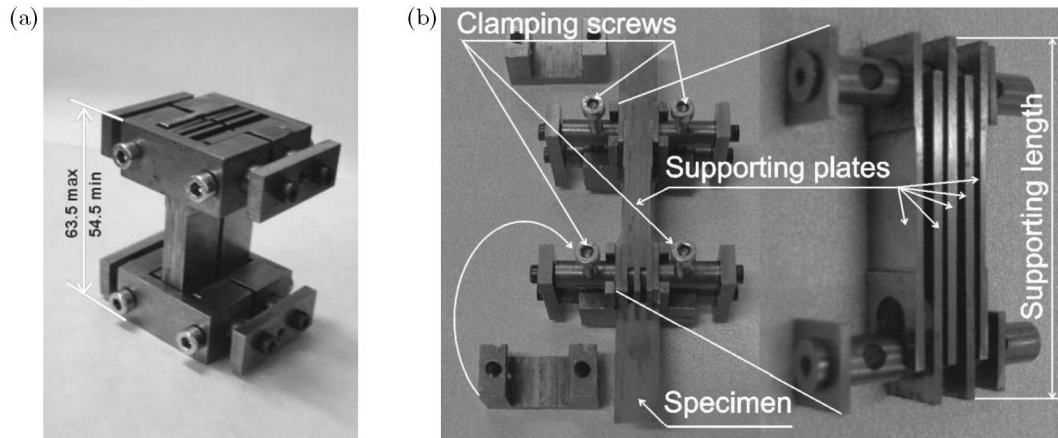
(a) A special fixture for compressive tests. (b) Expanded views of supporting plates and the fixture with mounted specimen and four clamping bolts
